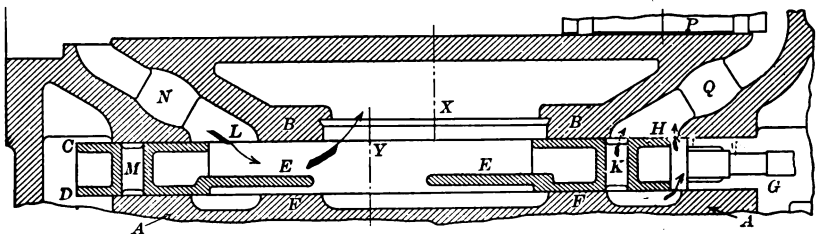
“STRAIGHT-LINE” PRESSURE-PLATE VALVE
